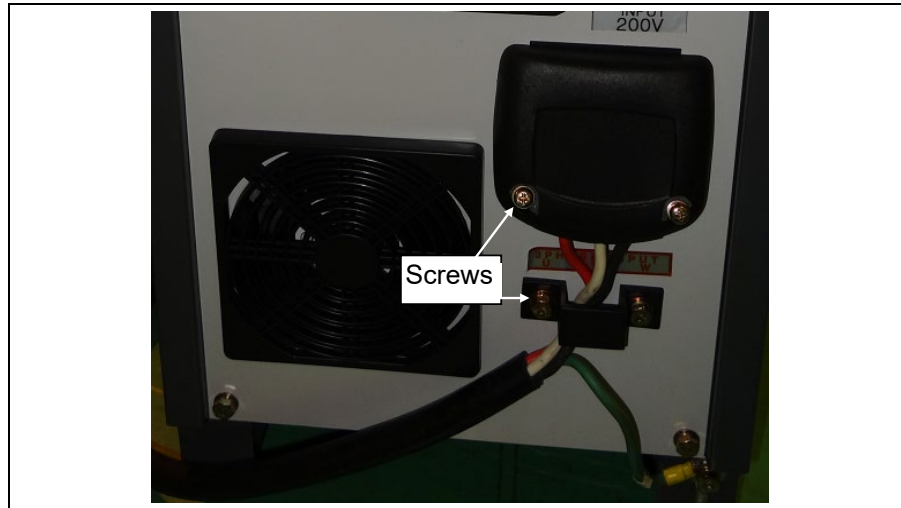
(c) Connection of welding power supply FH350i, FH350iP (3/3)
